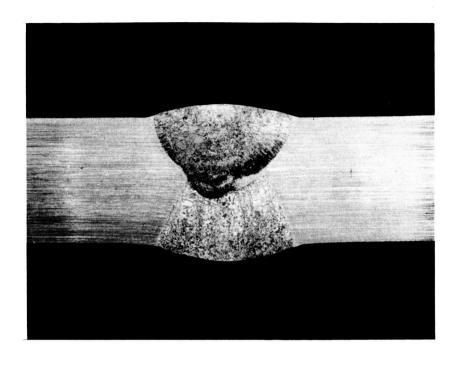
TYPICAL CROSS-SECTION AND JOINT PREPARATION FOR 0.50-INCH TIG DOUBLE V WELDMENTS
